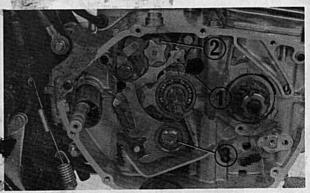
(1) Gearshift arm (2) Gearshift drum (3) Gearshift spindle
